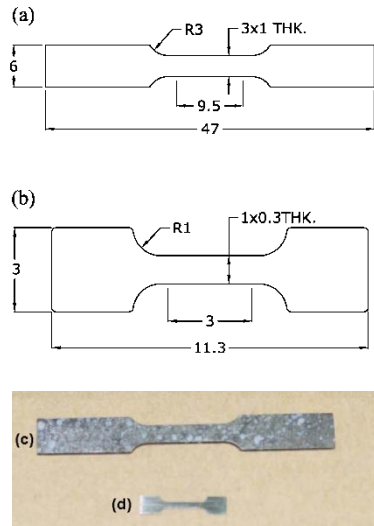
Dimensional details of (a) Sub-size flat specimen and (b) Miniature Tensile Test Specimens and respective photographs in (c) and (d)
